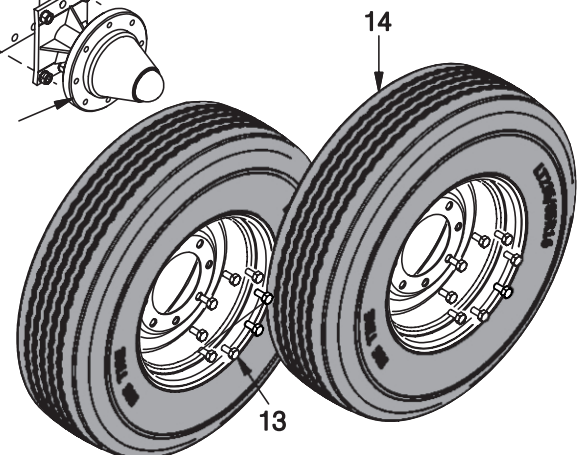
Mounting Tandem Wheel Plate Hubs and Tires
